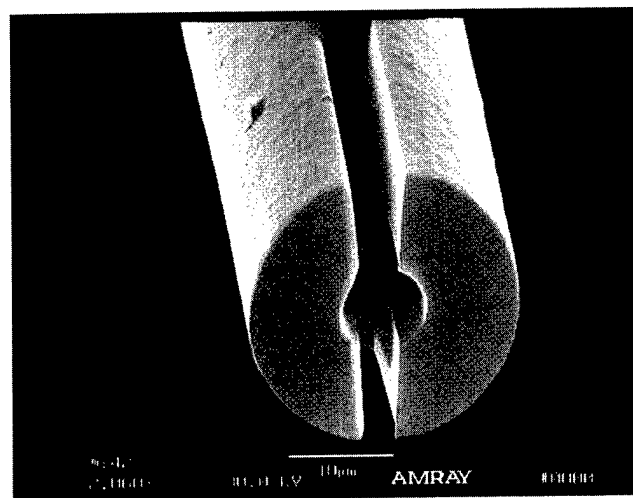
Nominal 30 μm diam fused silica microtube that has been cut and machined lengthwise by FIB milling. The nominal channel dimensions are 3 μm ×40 μm .
